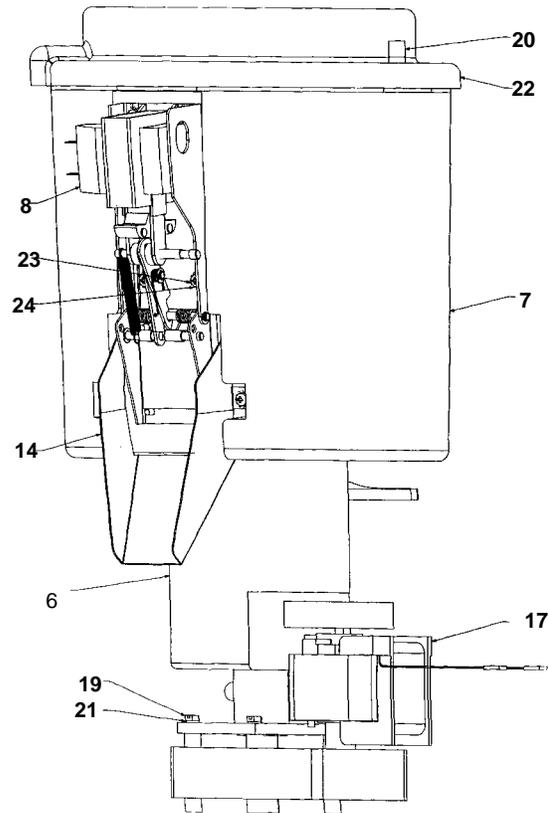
FRONT END ASSEMBLY AND PARTS LIST
